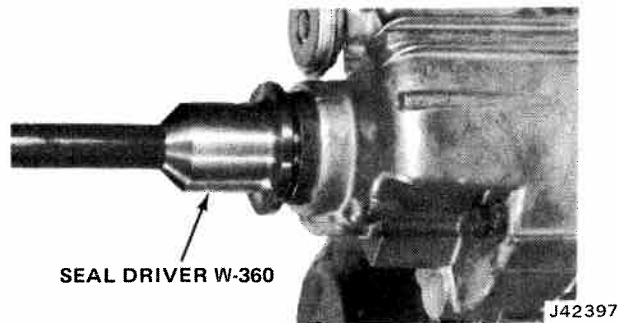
Installing Rear Output Shaft Oil Seal
